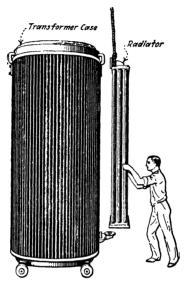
Showing a method of attaching a radiator to a transformer tank. (General Electric Co., Inst. Bk. No. 85210-A.)
